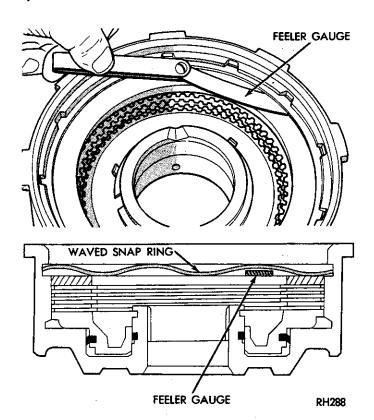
Measuring Front Clutch Pack Clearance (Typical)
